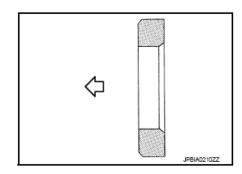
Identifying Chamfered Pilot Converter Courtesy of NISSAN NORTH AMERICA, INC.
